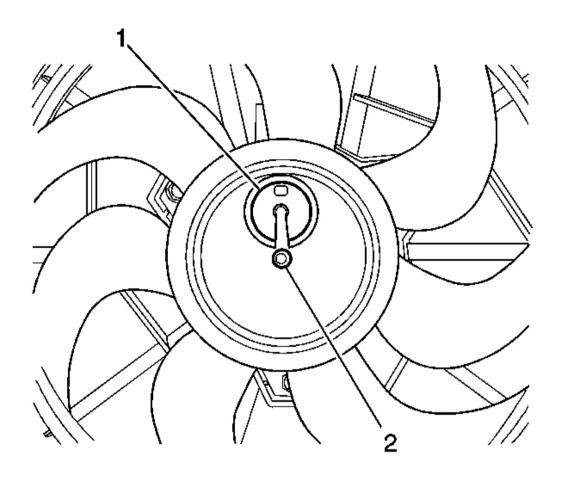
View Of Fan Retaining Clip From The Motor Shaft Courtesy of GENERAL MOTORS CORP.
